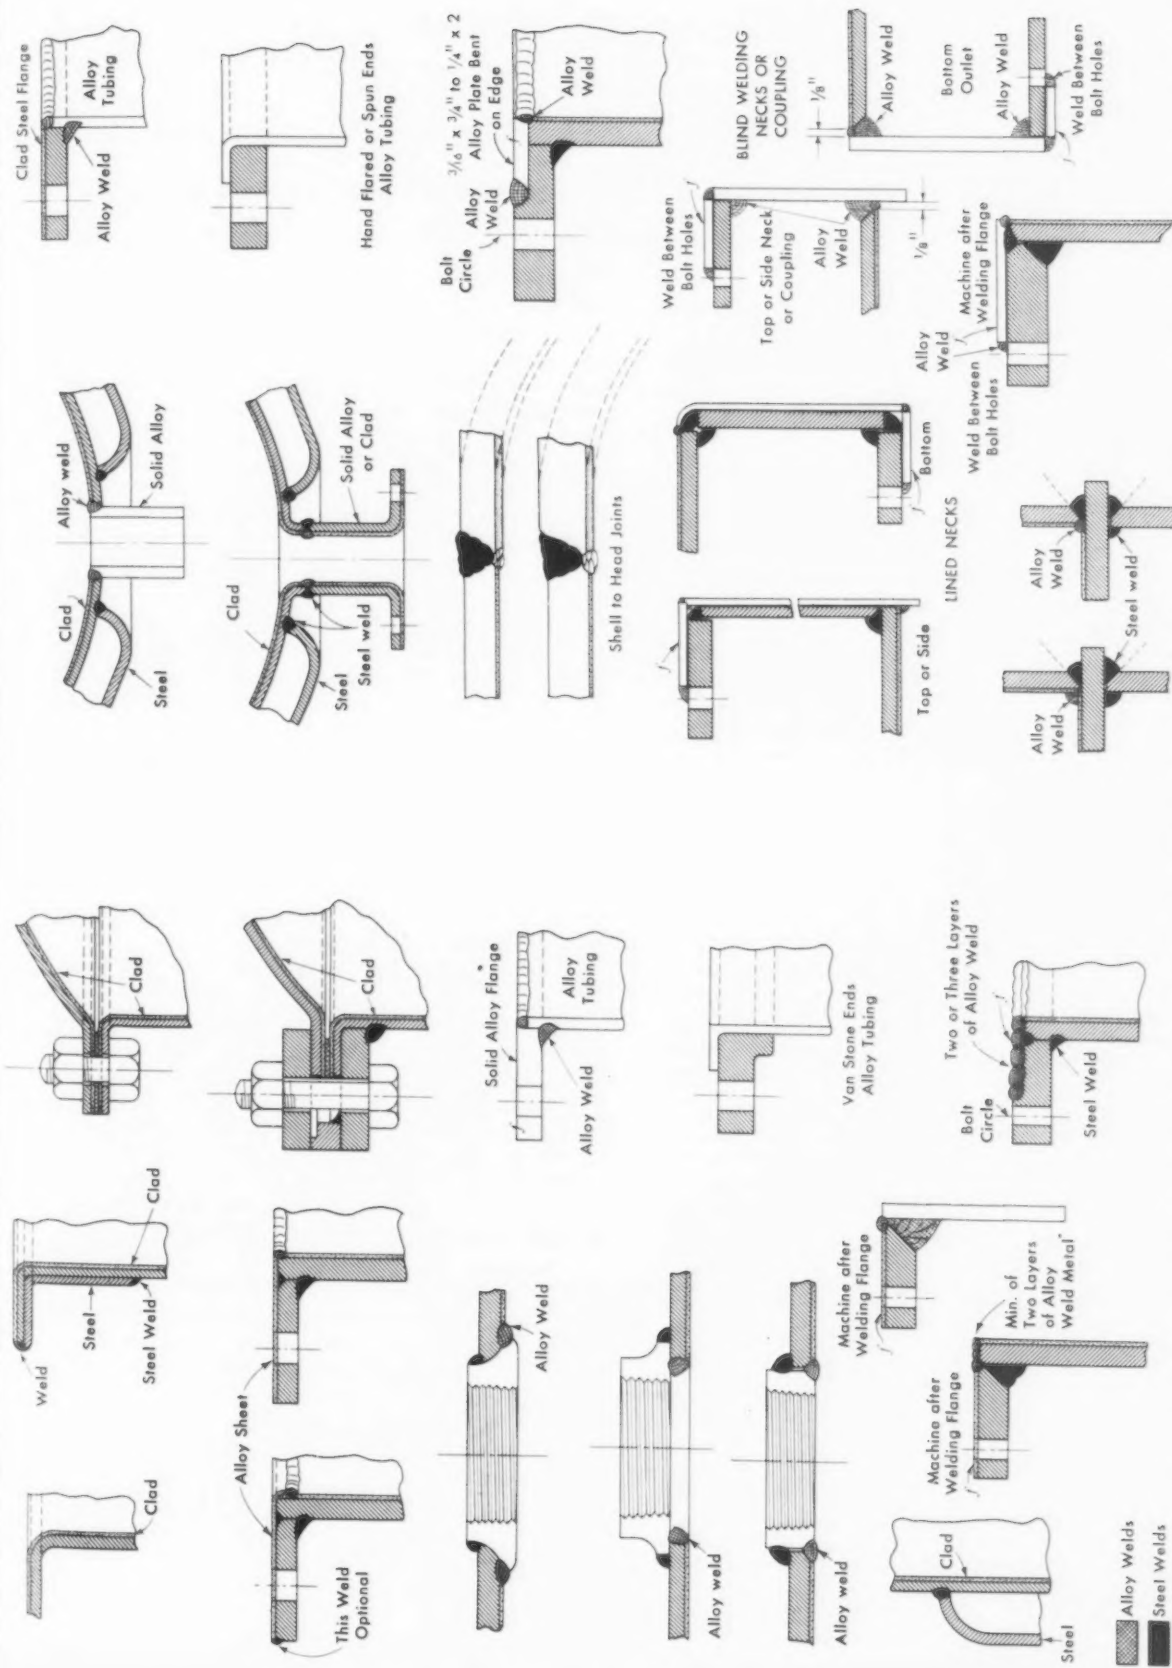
These are methods of providing continuity of the cladding surface by welding clad material throughout the composite thickness of the material.
